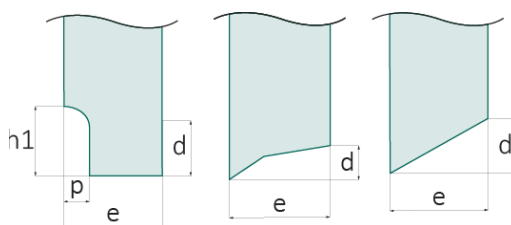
Dimensions defining chips and shelling at the glass edge.
